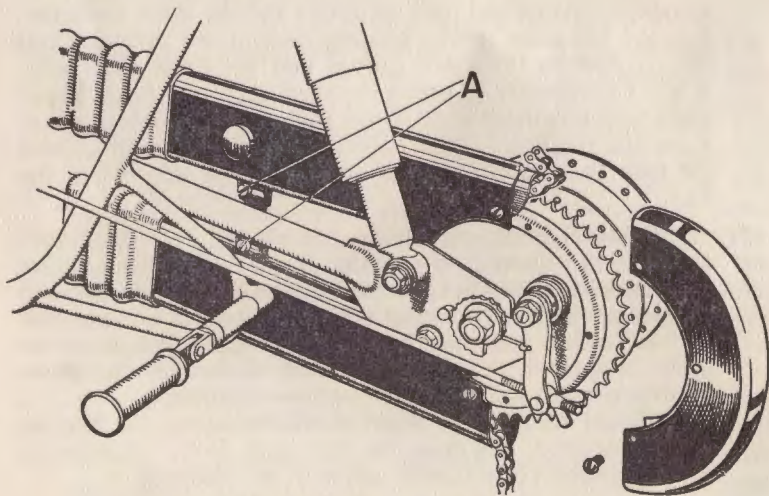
Rear Wheel Adjustment, showing movement of Rear Chaincase and detachable part of Chaincase “exploded” (where fitted).
